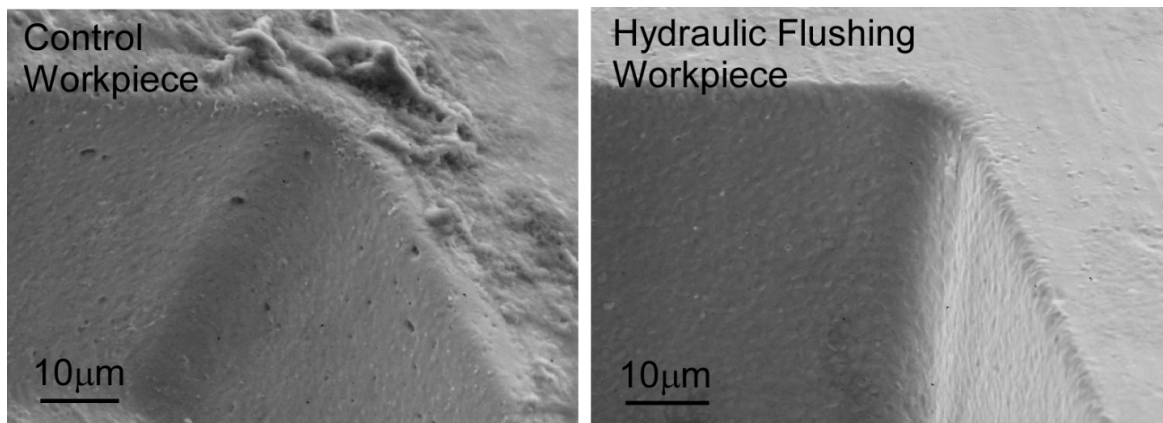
Workpiece detail shows Left: pits in the sidewall of the control workpiece from spurious discharges and debris on the surface. Right: smooth sidewalls and clean top surface.
